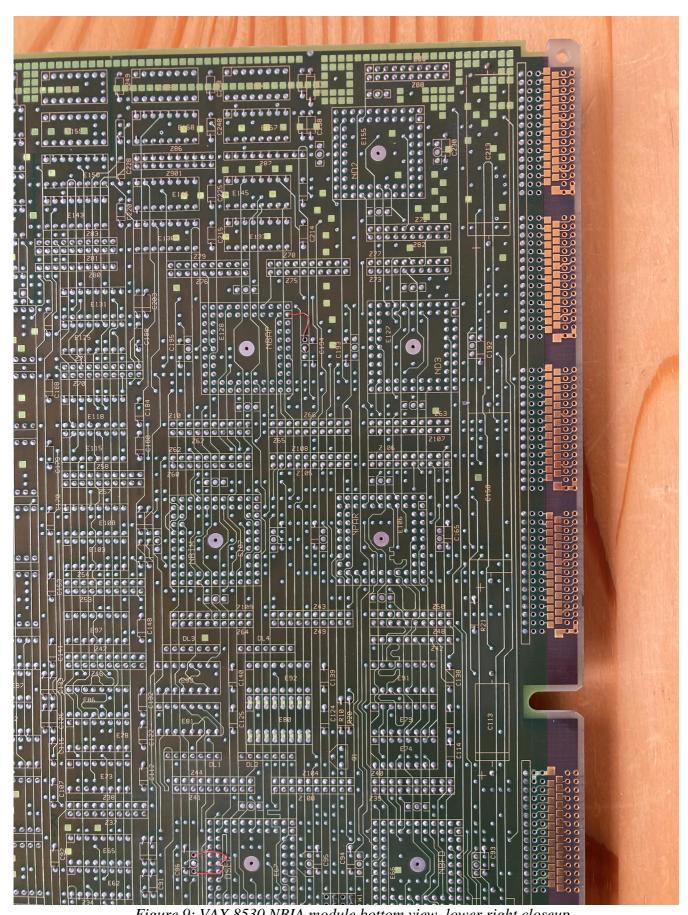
VAX 8530 NBIA module bottom view, lower right closeup
